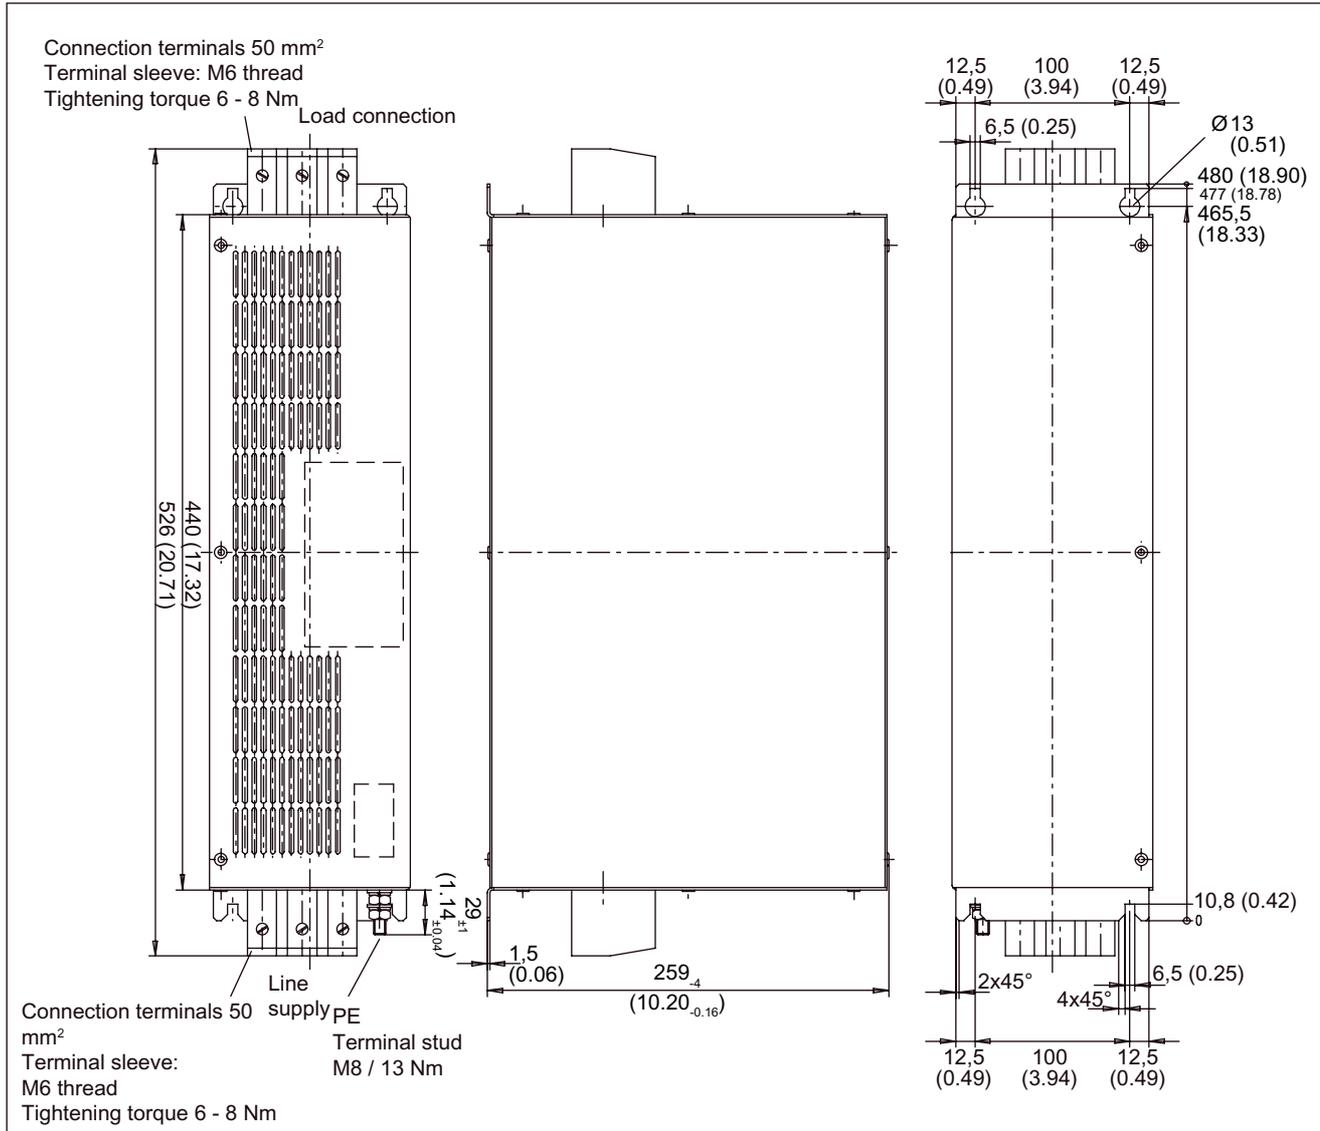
Dimension drawing of Wideband Line Filter 55 kW for Active Lines Modules, all dimensions in mm and (inches)
